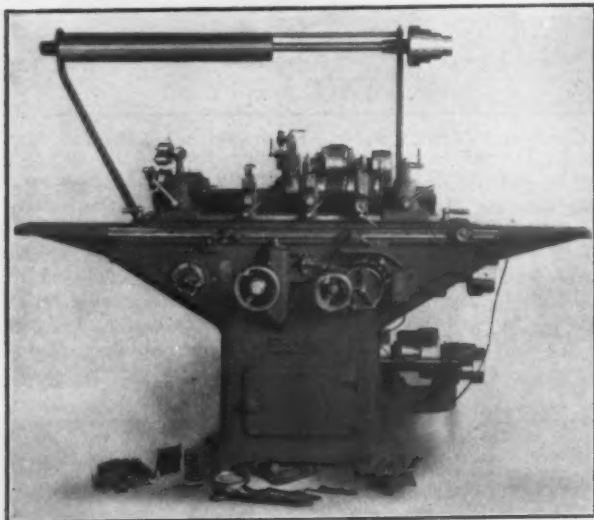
The Automatic Cylindrical Sizing Grinder Built by the Pratt & Whitney Company, Hartford, Conn.
